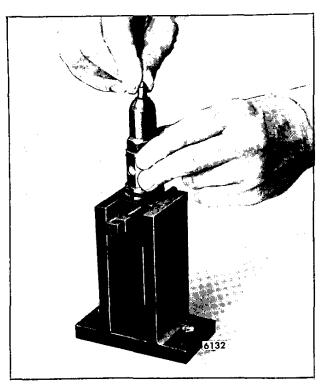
· Tightening Injector Nut by Hand while Rotating Injector Spray Tip
